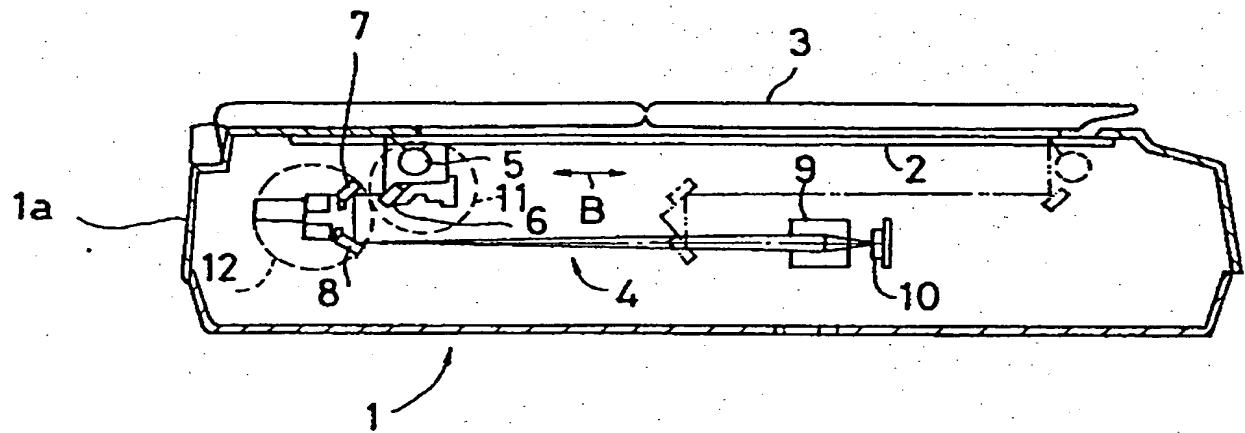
is a side view of an embodiment of image reading apparatus of the invention, Fig. 2 is its see-through perspective view, Fig. 3 is a perspective view of rear side of main body case, Fig. 4 is a diagram showing reading waveform by image sensor, and Fig. 5 is a control block diagram.
